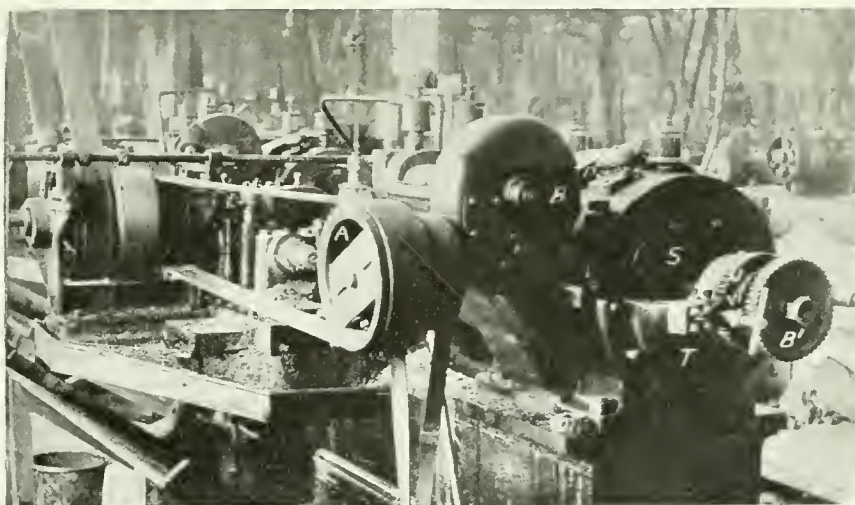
SPECIAL THREAD MILLING MACHINE—REAR VIEW.
